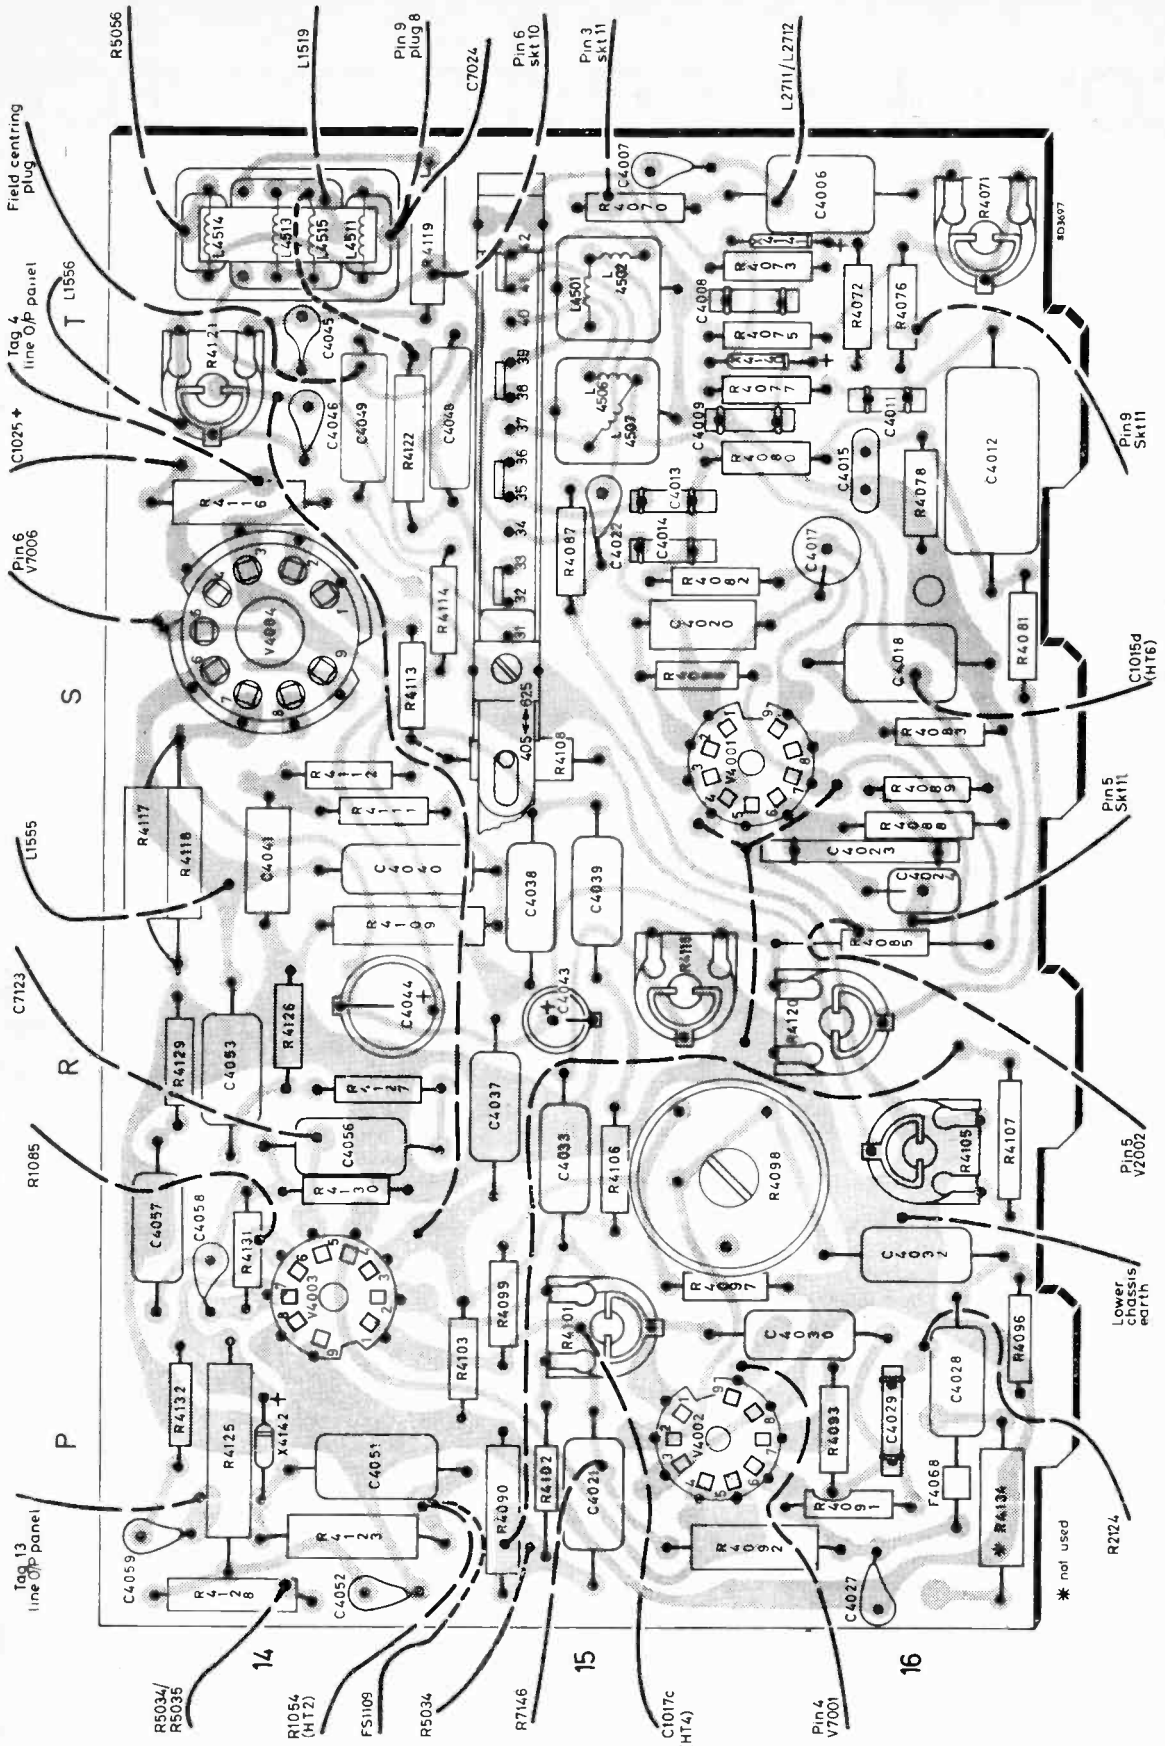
Layout of the timebase printed panel, viewed from the component side.
